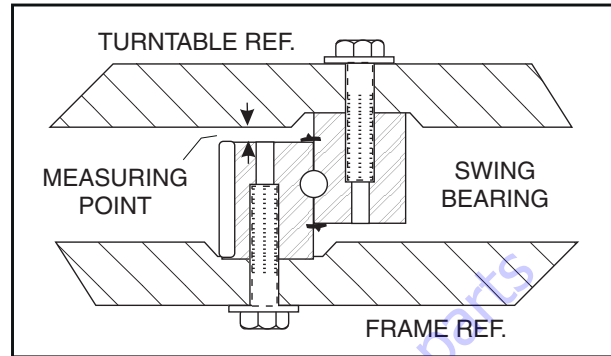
Swing Bearing Tolerance Measuring Point
